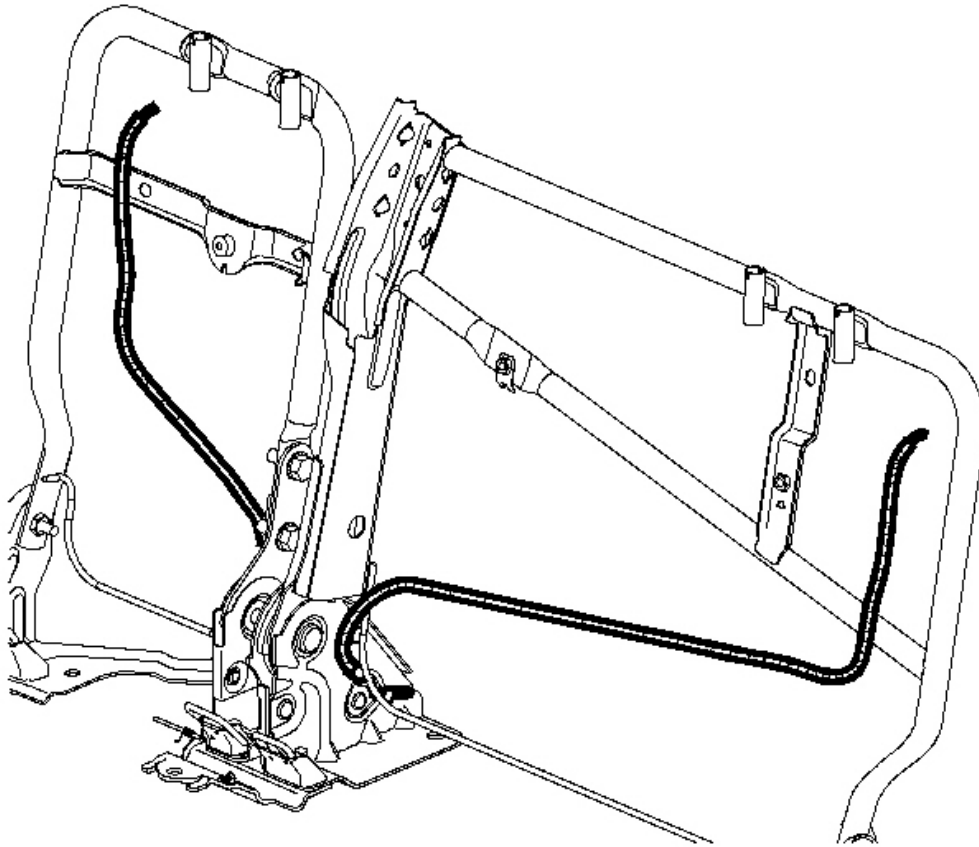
Replacing Cable Out Of Seat Back Assembly
